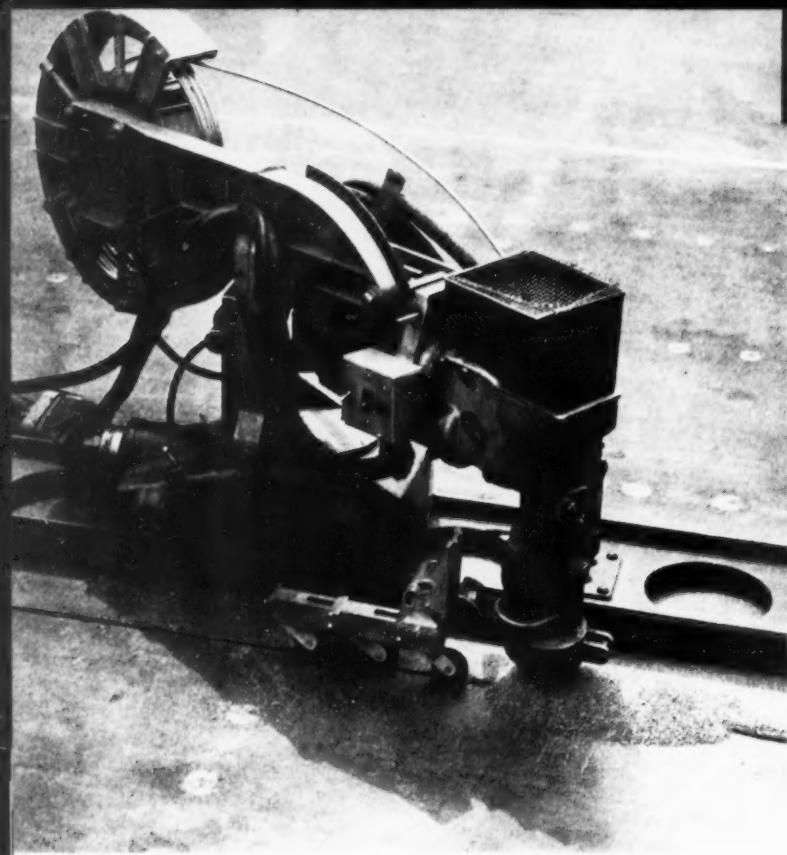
In Unionmelt Welding, the Electrode is Completely Covered by a Granulated Material, and the Operation is Performed without any Visible Arc, Sparks, or Smoke
